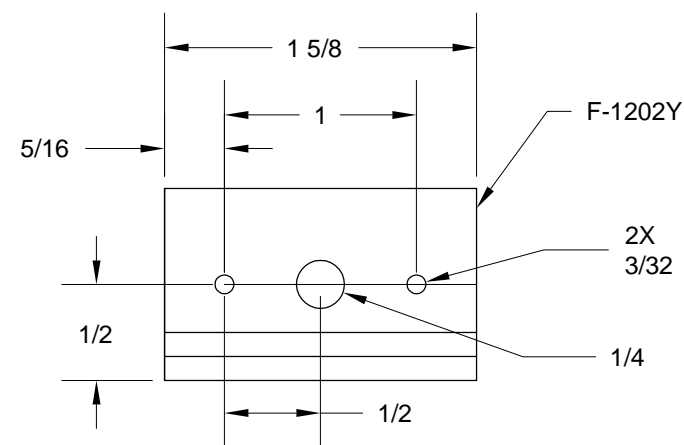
MAKING THE STRUT ATTACH ANGLE
